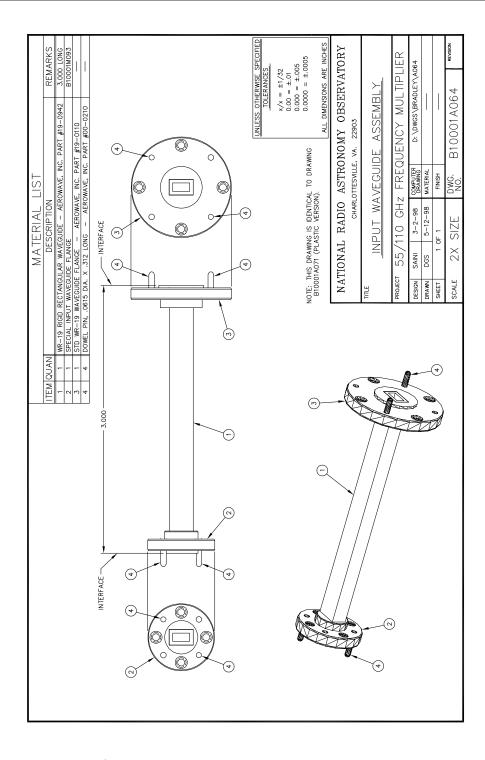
55/110 GHz frequency doubler: WR-19 input waveguide flange adapter assembly.
